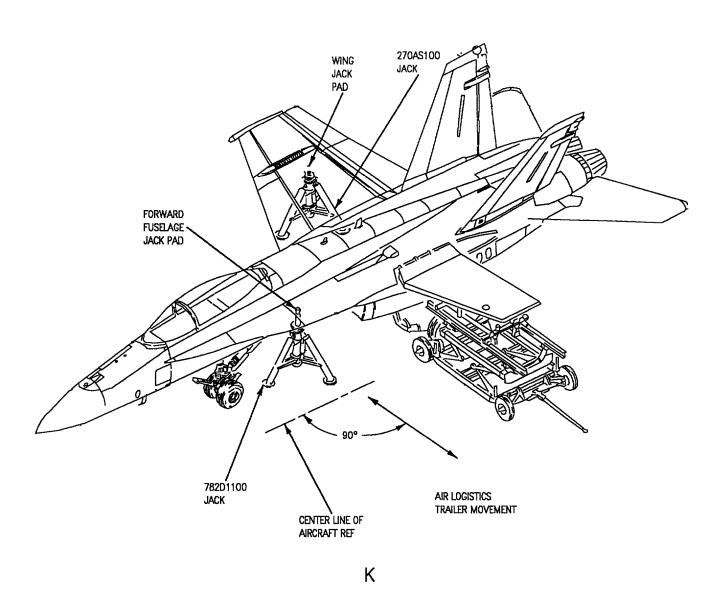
Inner Wing Removal and Installation Adapter (Sheet 6)
